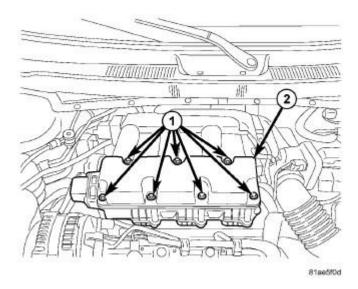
INTAKE RETAINER VIEW Courtesy of CHRYSLER LLC
